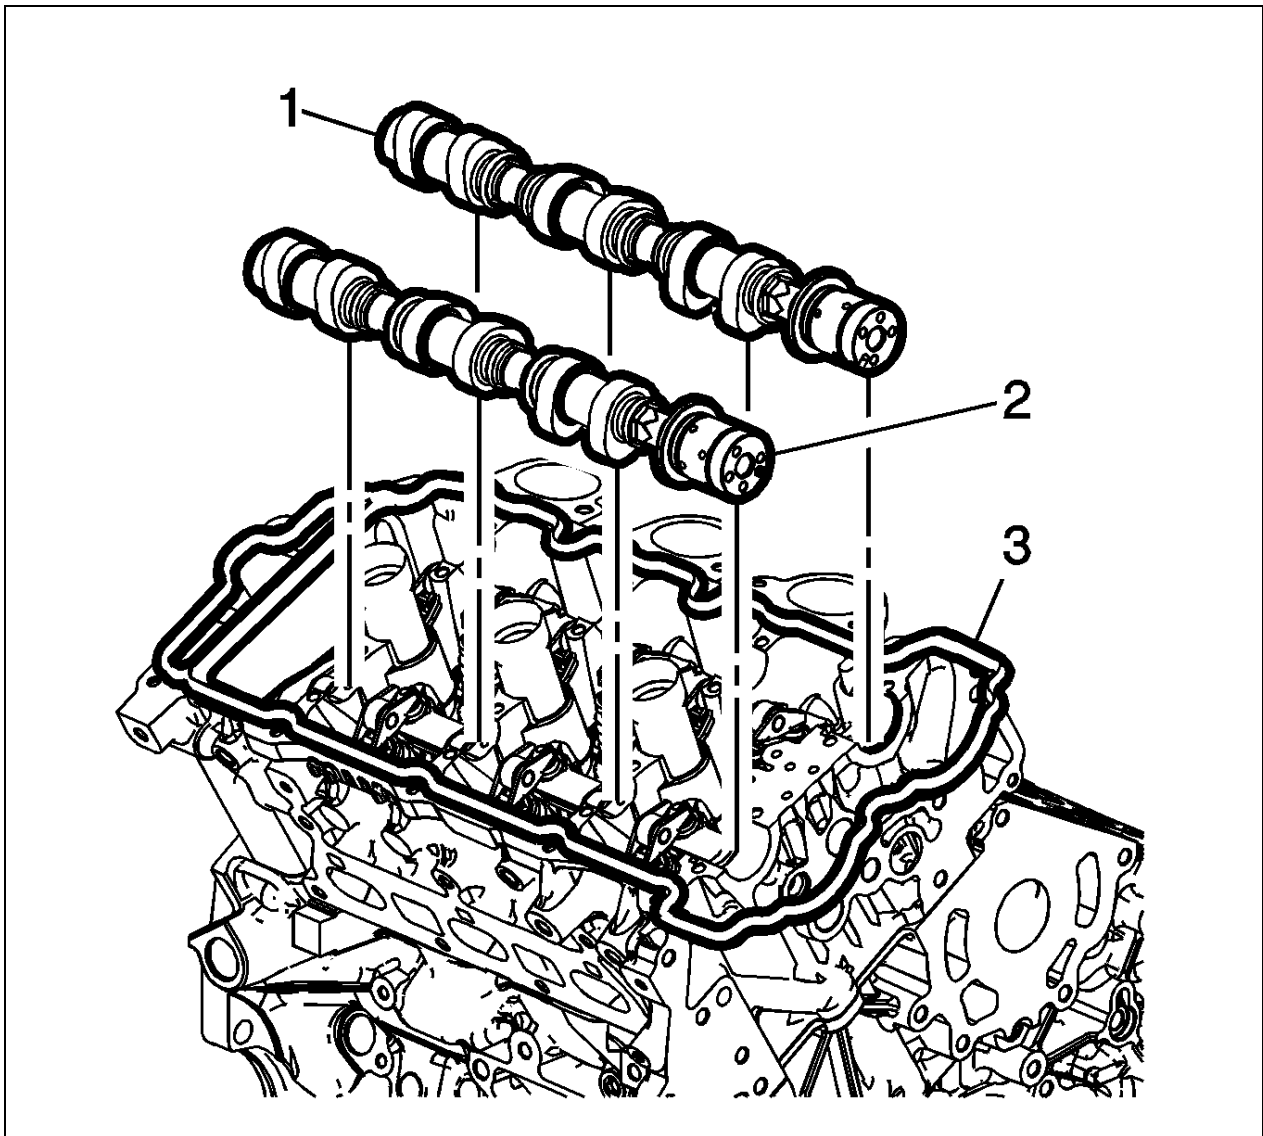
Right Cylinder Head Camshaft Lubrication Points
